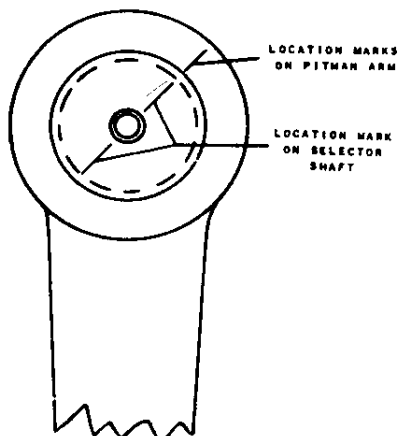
PITMAN ARM TO LEVER SHAFT ASSEMBLY MARKS
